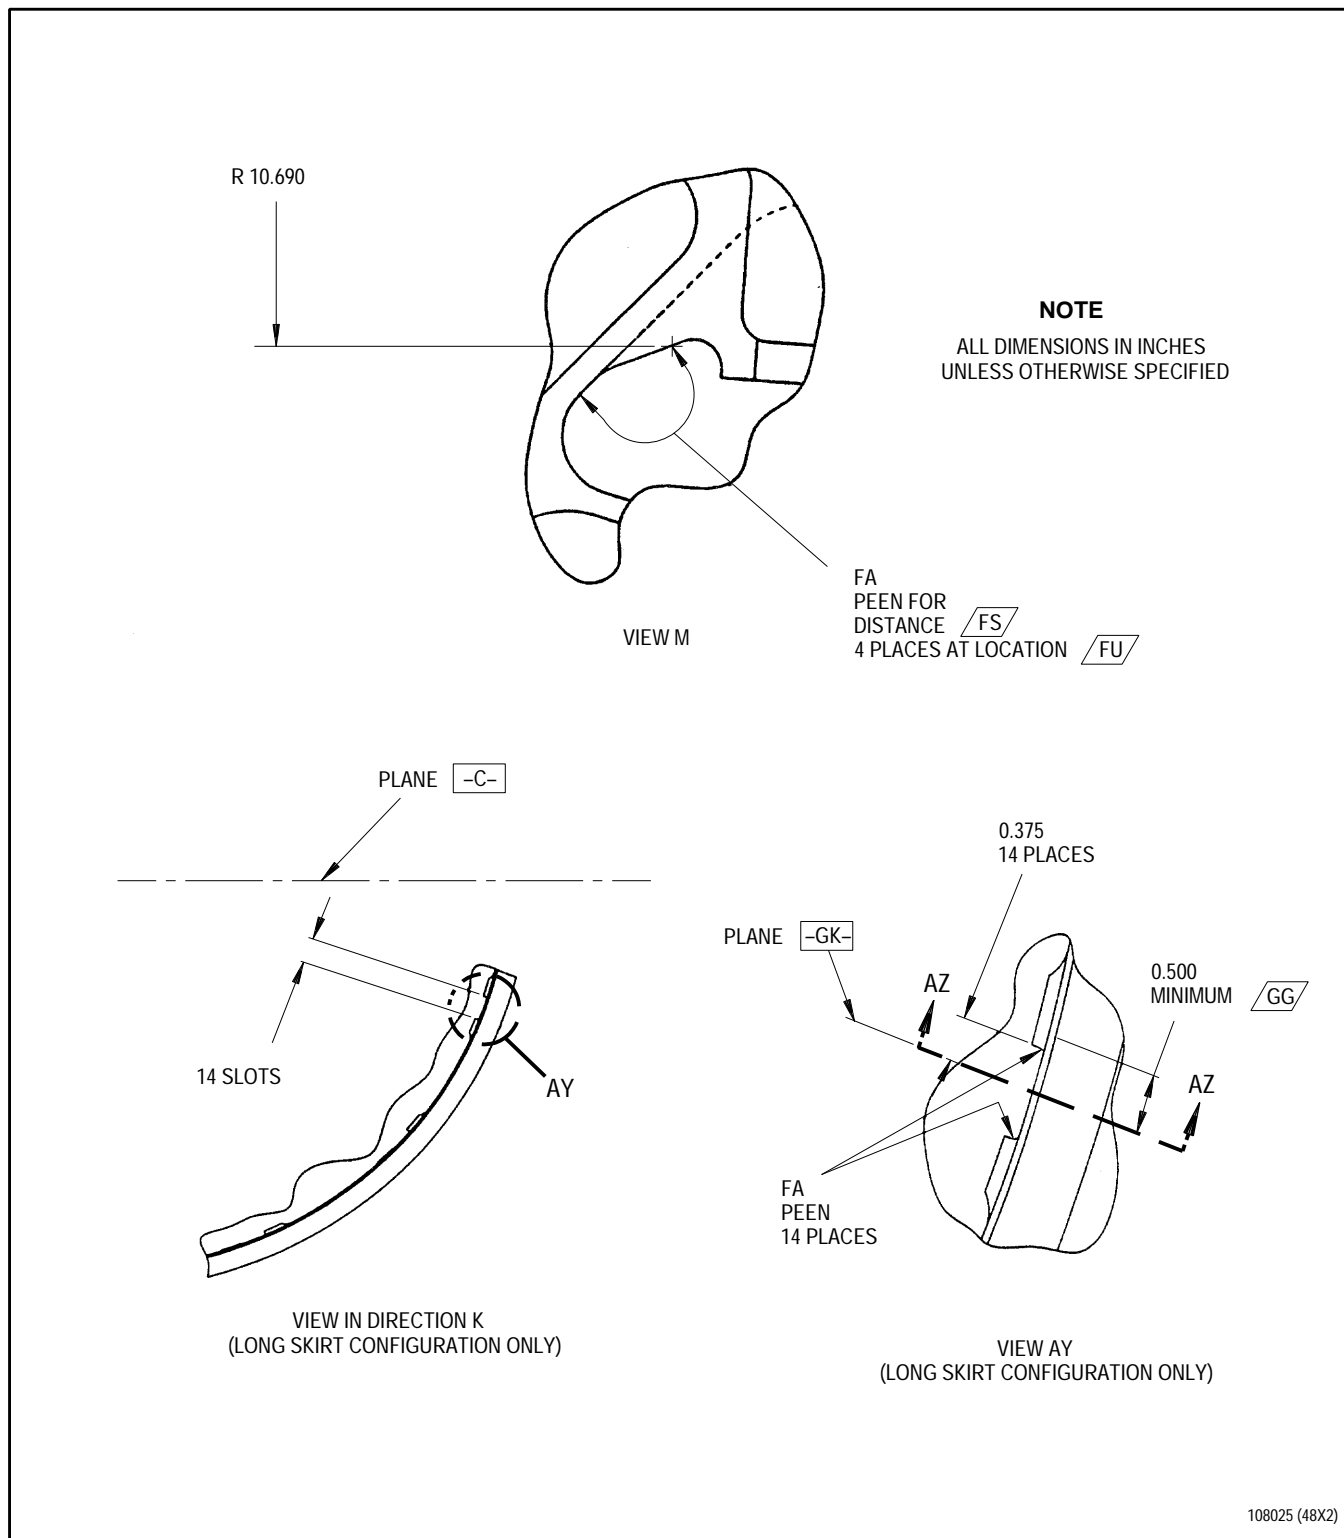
Diffuser Case Assembly - Shotpeen Requirements (Sheet 5 of 6)
